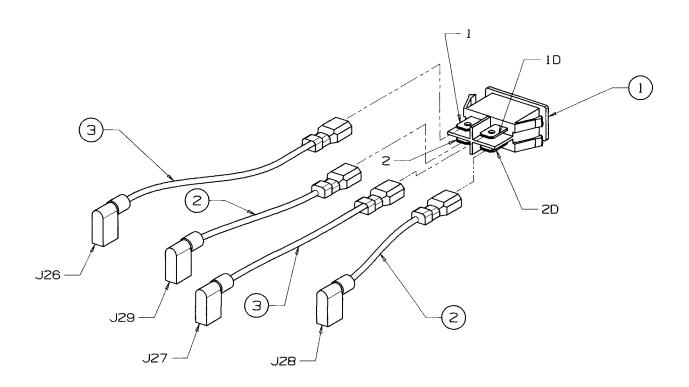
CE4000 Power Switch Assembly (Exploded View)
